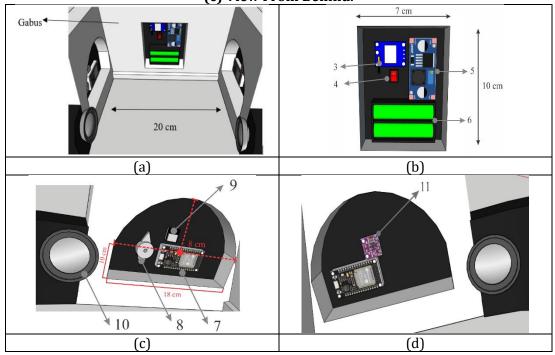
Hardware Design Inside View, (a) Overall Design, (b) View back side (c) View right side, (d) View left side.
